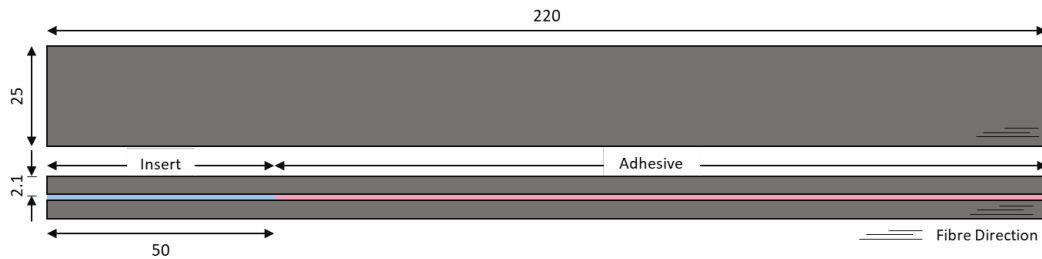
Scheme of the adopted ENF specimen. All dimensions in mm.
